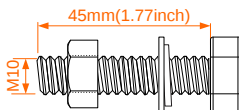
Dimensions of fastener for metal frame (figures in mm)
